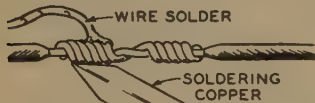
In soldering, do not drop hot solder on cold wire. Heat the wire until it is hot enough to melt solder.
